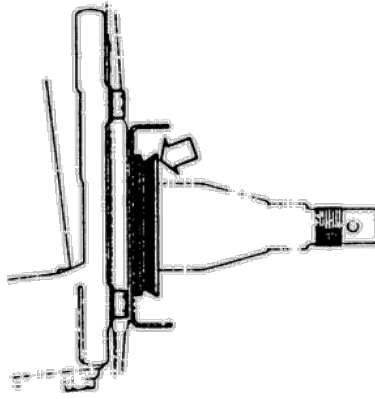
Press the sealing ring onto the spindle before installing the hub assembly
